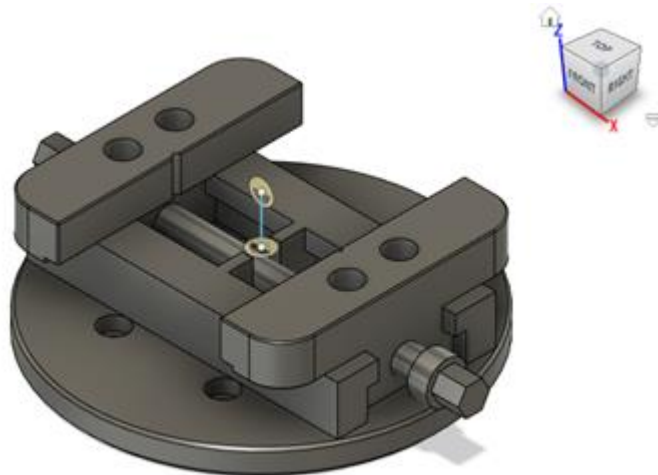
Vise Model developed to retract the physical one to be used on the machining process
